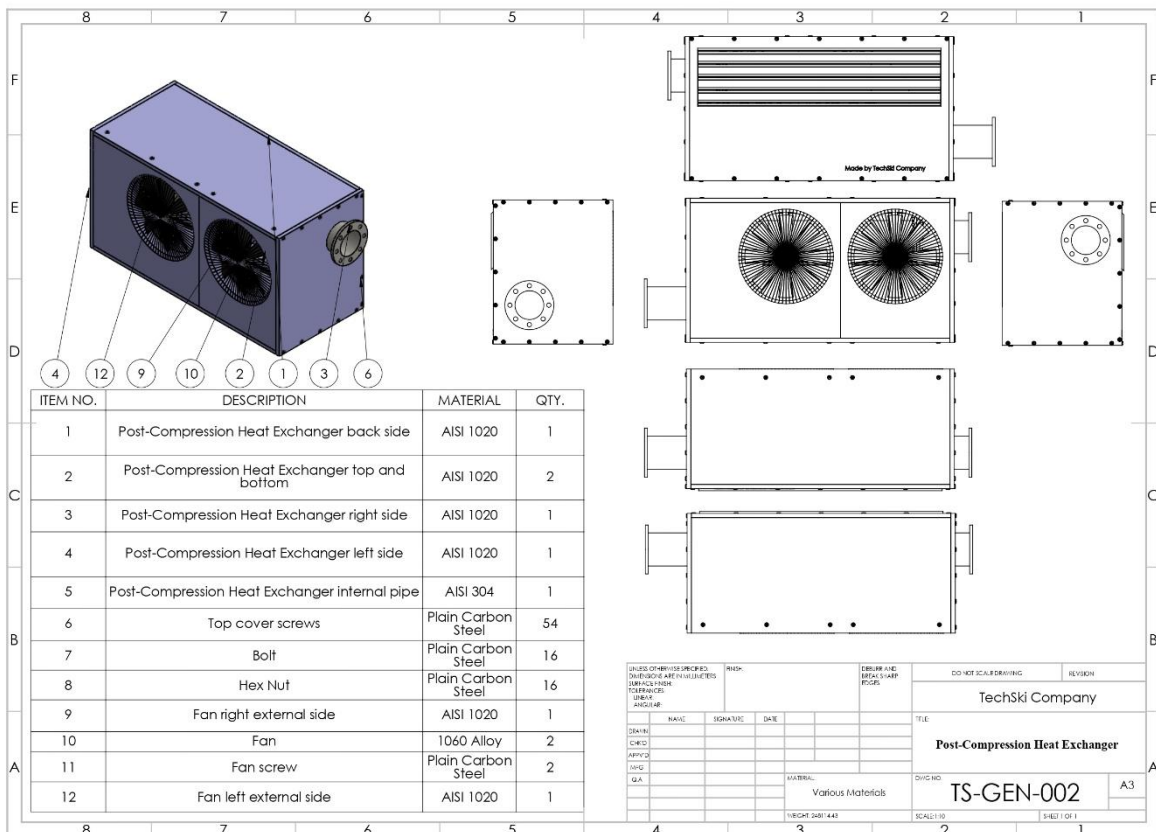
Post-Compression Heat Exchanger Technical Drawing
